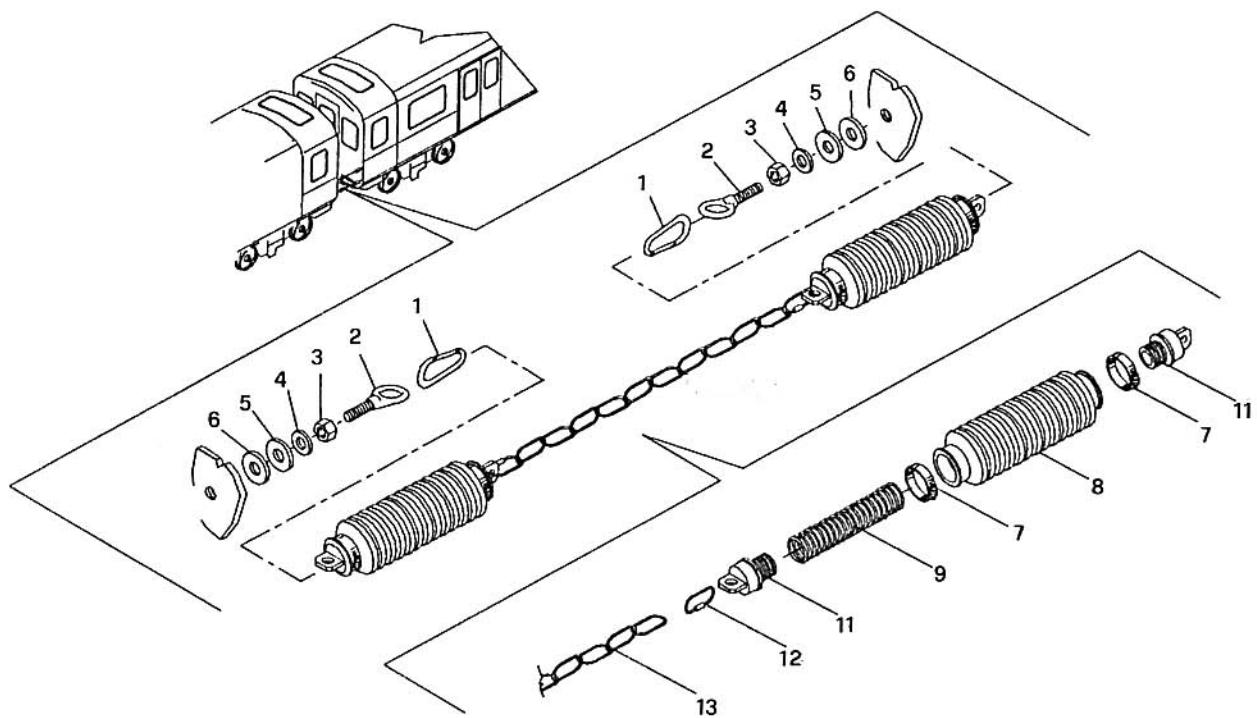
Intercar Barriers Installation/Removal/Disassembly/Reassembly
